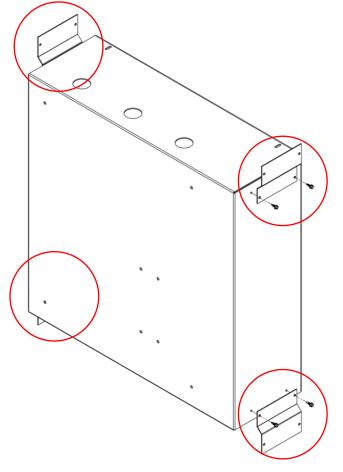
S-Series Enclosure Flush Mount Flange Installation
